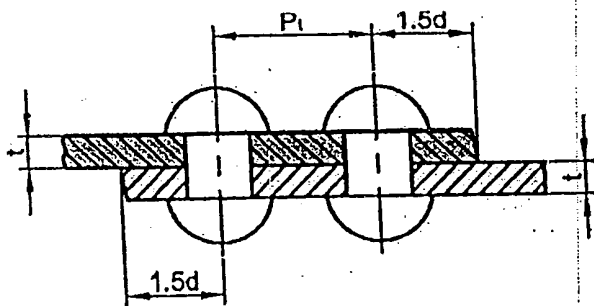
Double Riveted Chain and Zigzag Lap Joints
